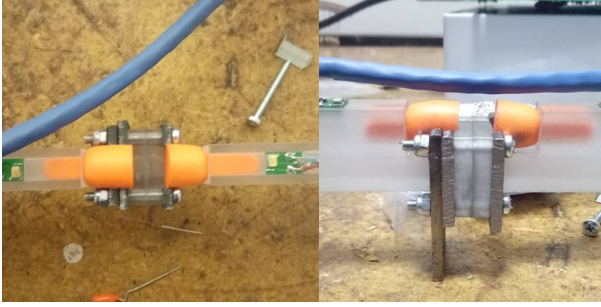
Actual flange assembly. Left: Top down view, Right: Profile view. NB: mild steel U shape clips.
